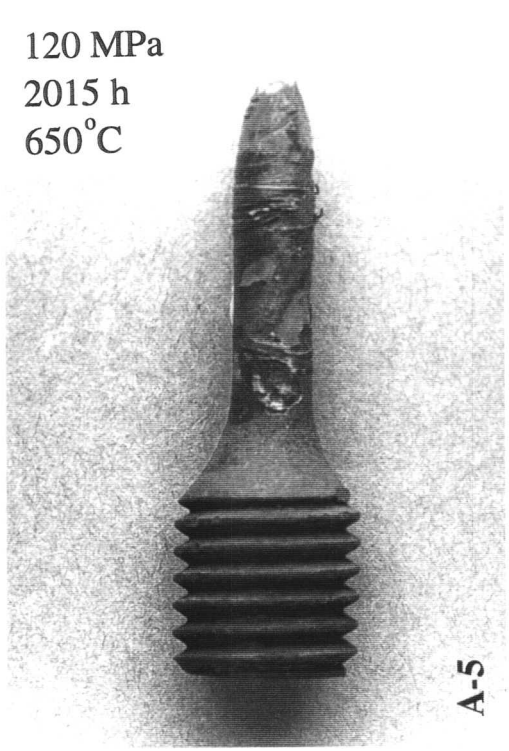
Creep test specimens of steel A. Specimen A-5 shows bad oxidation damage.
